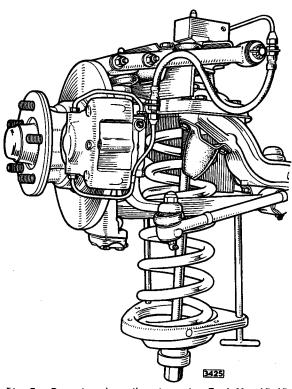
Removing the coil spring using Tool No. JD.6B.
